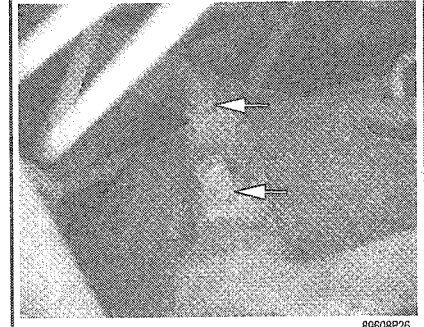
Remove the bolts and nuts holding the idler arm to the frame
